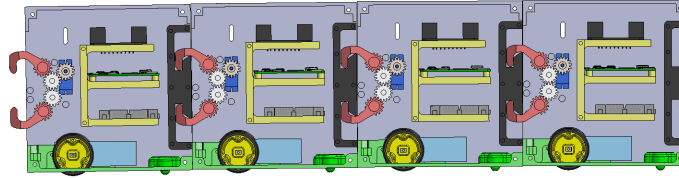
Example of 3 Cubes held by One Gripper Assembly
